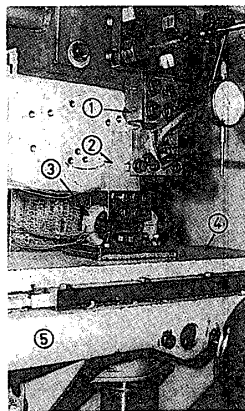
View of experimental apparatus. ①: composite tool for cutting resistance measurement, ②: test specimen, ③: octagonal elastic-ring dynamometer for cutting force measurement, ④: feed carriage, ⑤: lift table.
